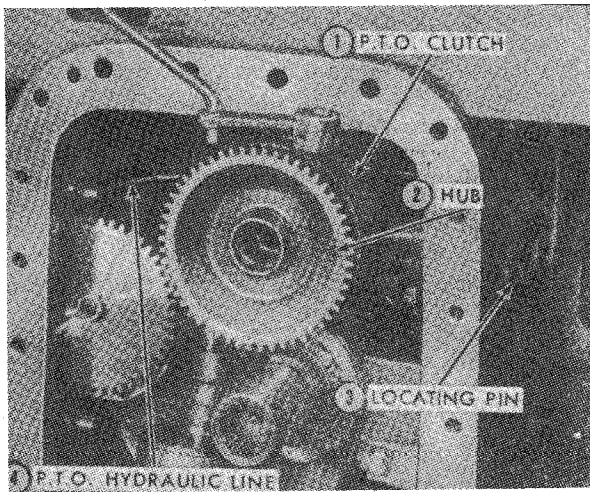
Remove pto clutch hub for access to pto hydraulic line. Remove locating pin (cap screw) to remove pto clutch and valve assembly.
